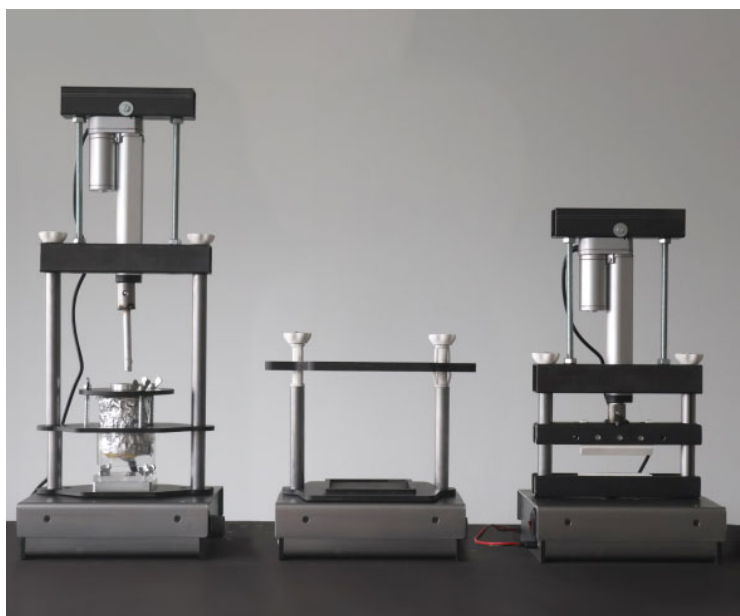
The experiential machine to experience from left to right: injection moulding, thermoforming, and sheet metal bending
